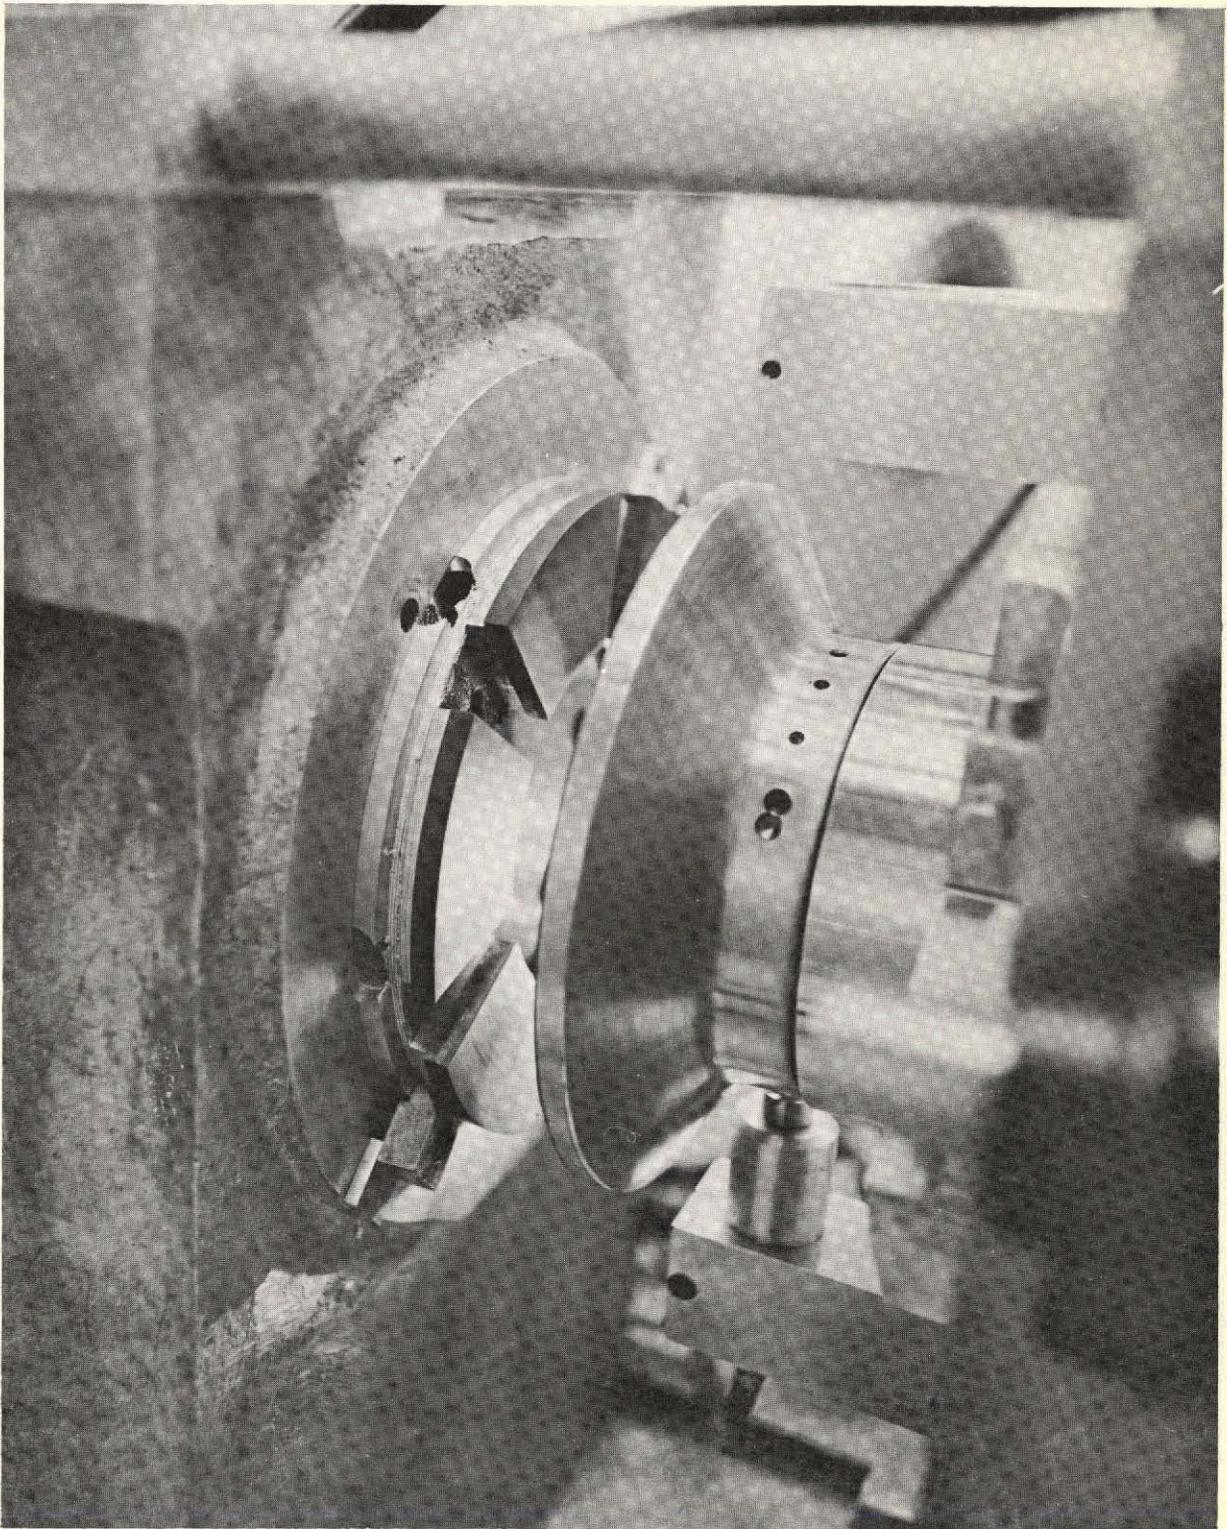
Compliant-Mounted Pad Type Thrust Bearing
